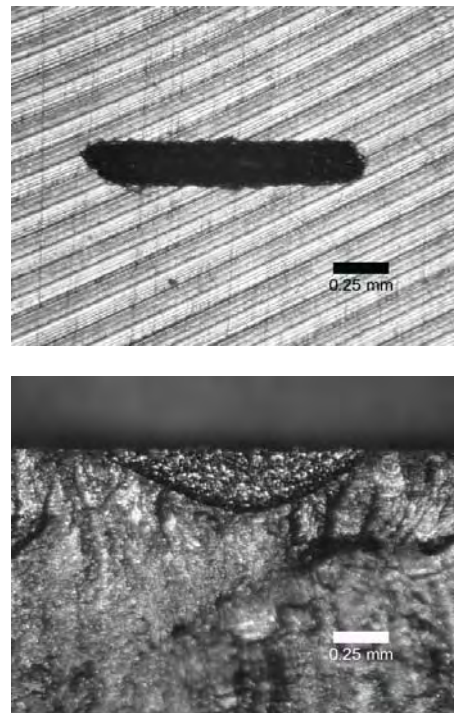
Optical photomicrographs showing (a) the top surface of a typical thick section specimen (as-milled surface condition) with the FOD of $a_o = 0.254$ mm (0.010 in) and $2c_o = 1.524$ mm (0.060 in) (b) fracture surface of a typical thick section specimen with the same FOD. The re-cast layer is evident as shiny speckles in the FOD area.
